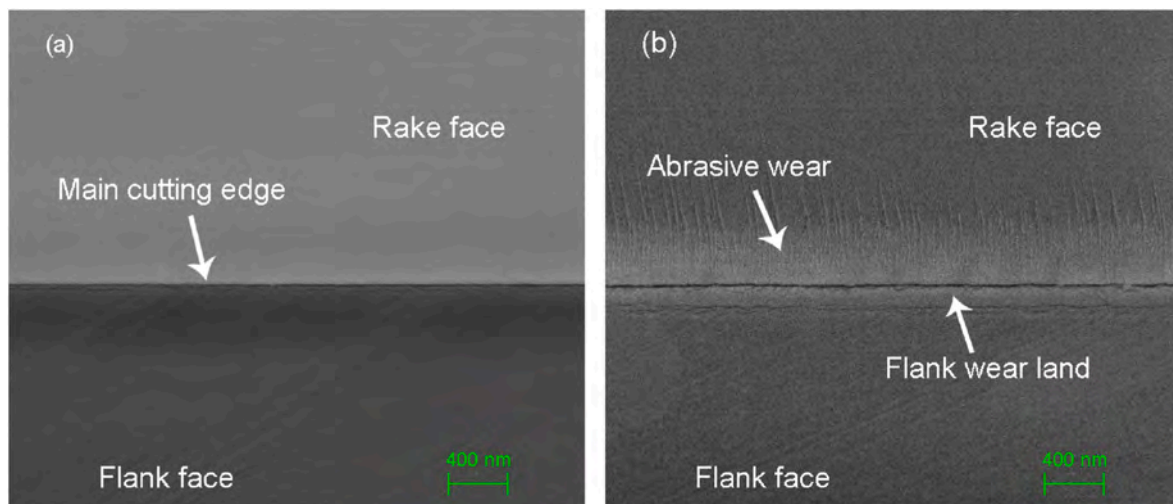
SEM images of cutting edges of (a) an unused tool and (b) the same tool after cutting for 5.5 km.
